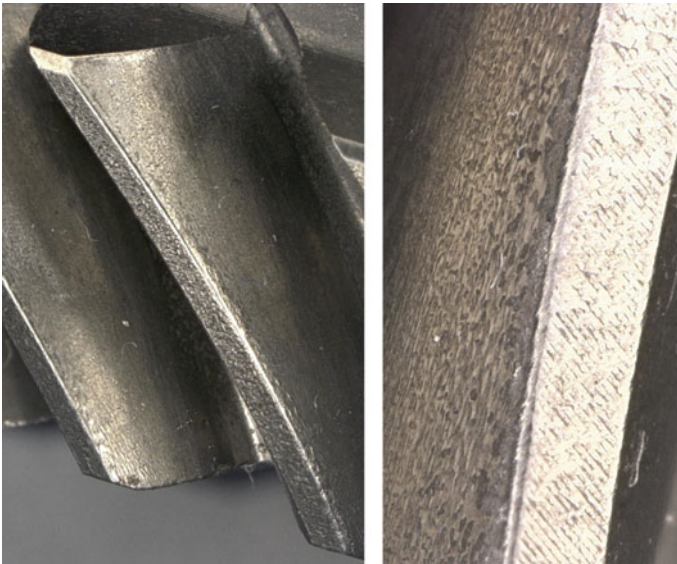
Sample Tip chamfering with EM tip end—spiral bevel pinion
